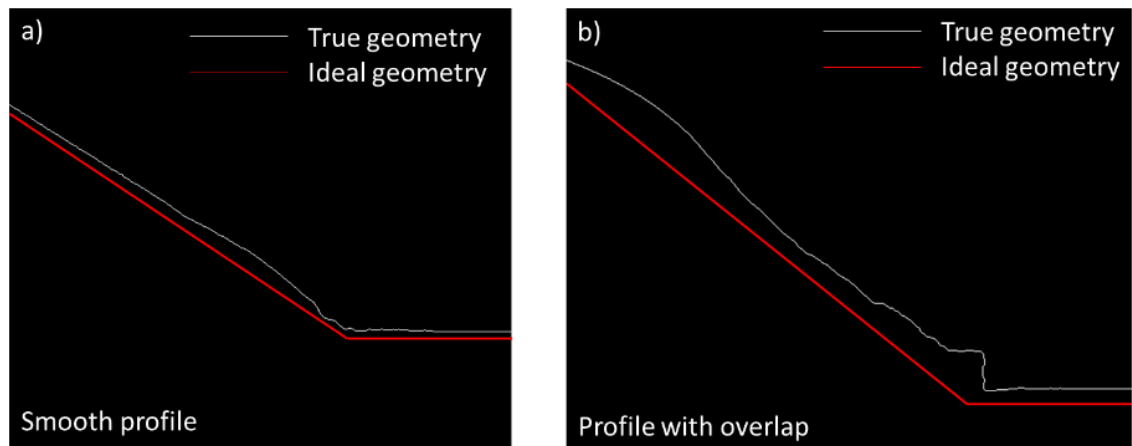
Challenges of mathematically representing the weld toe profile – a) A smooth weld toe profile which is relatively easier to numerically represent as an ideal weld toe geometry, as compared with b) a profile with an overlap, where the ideal geometry is unable to represent the flaw.
